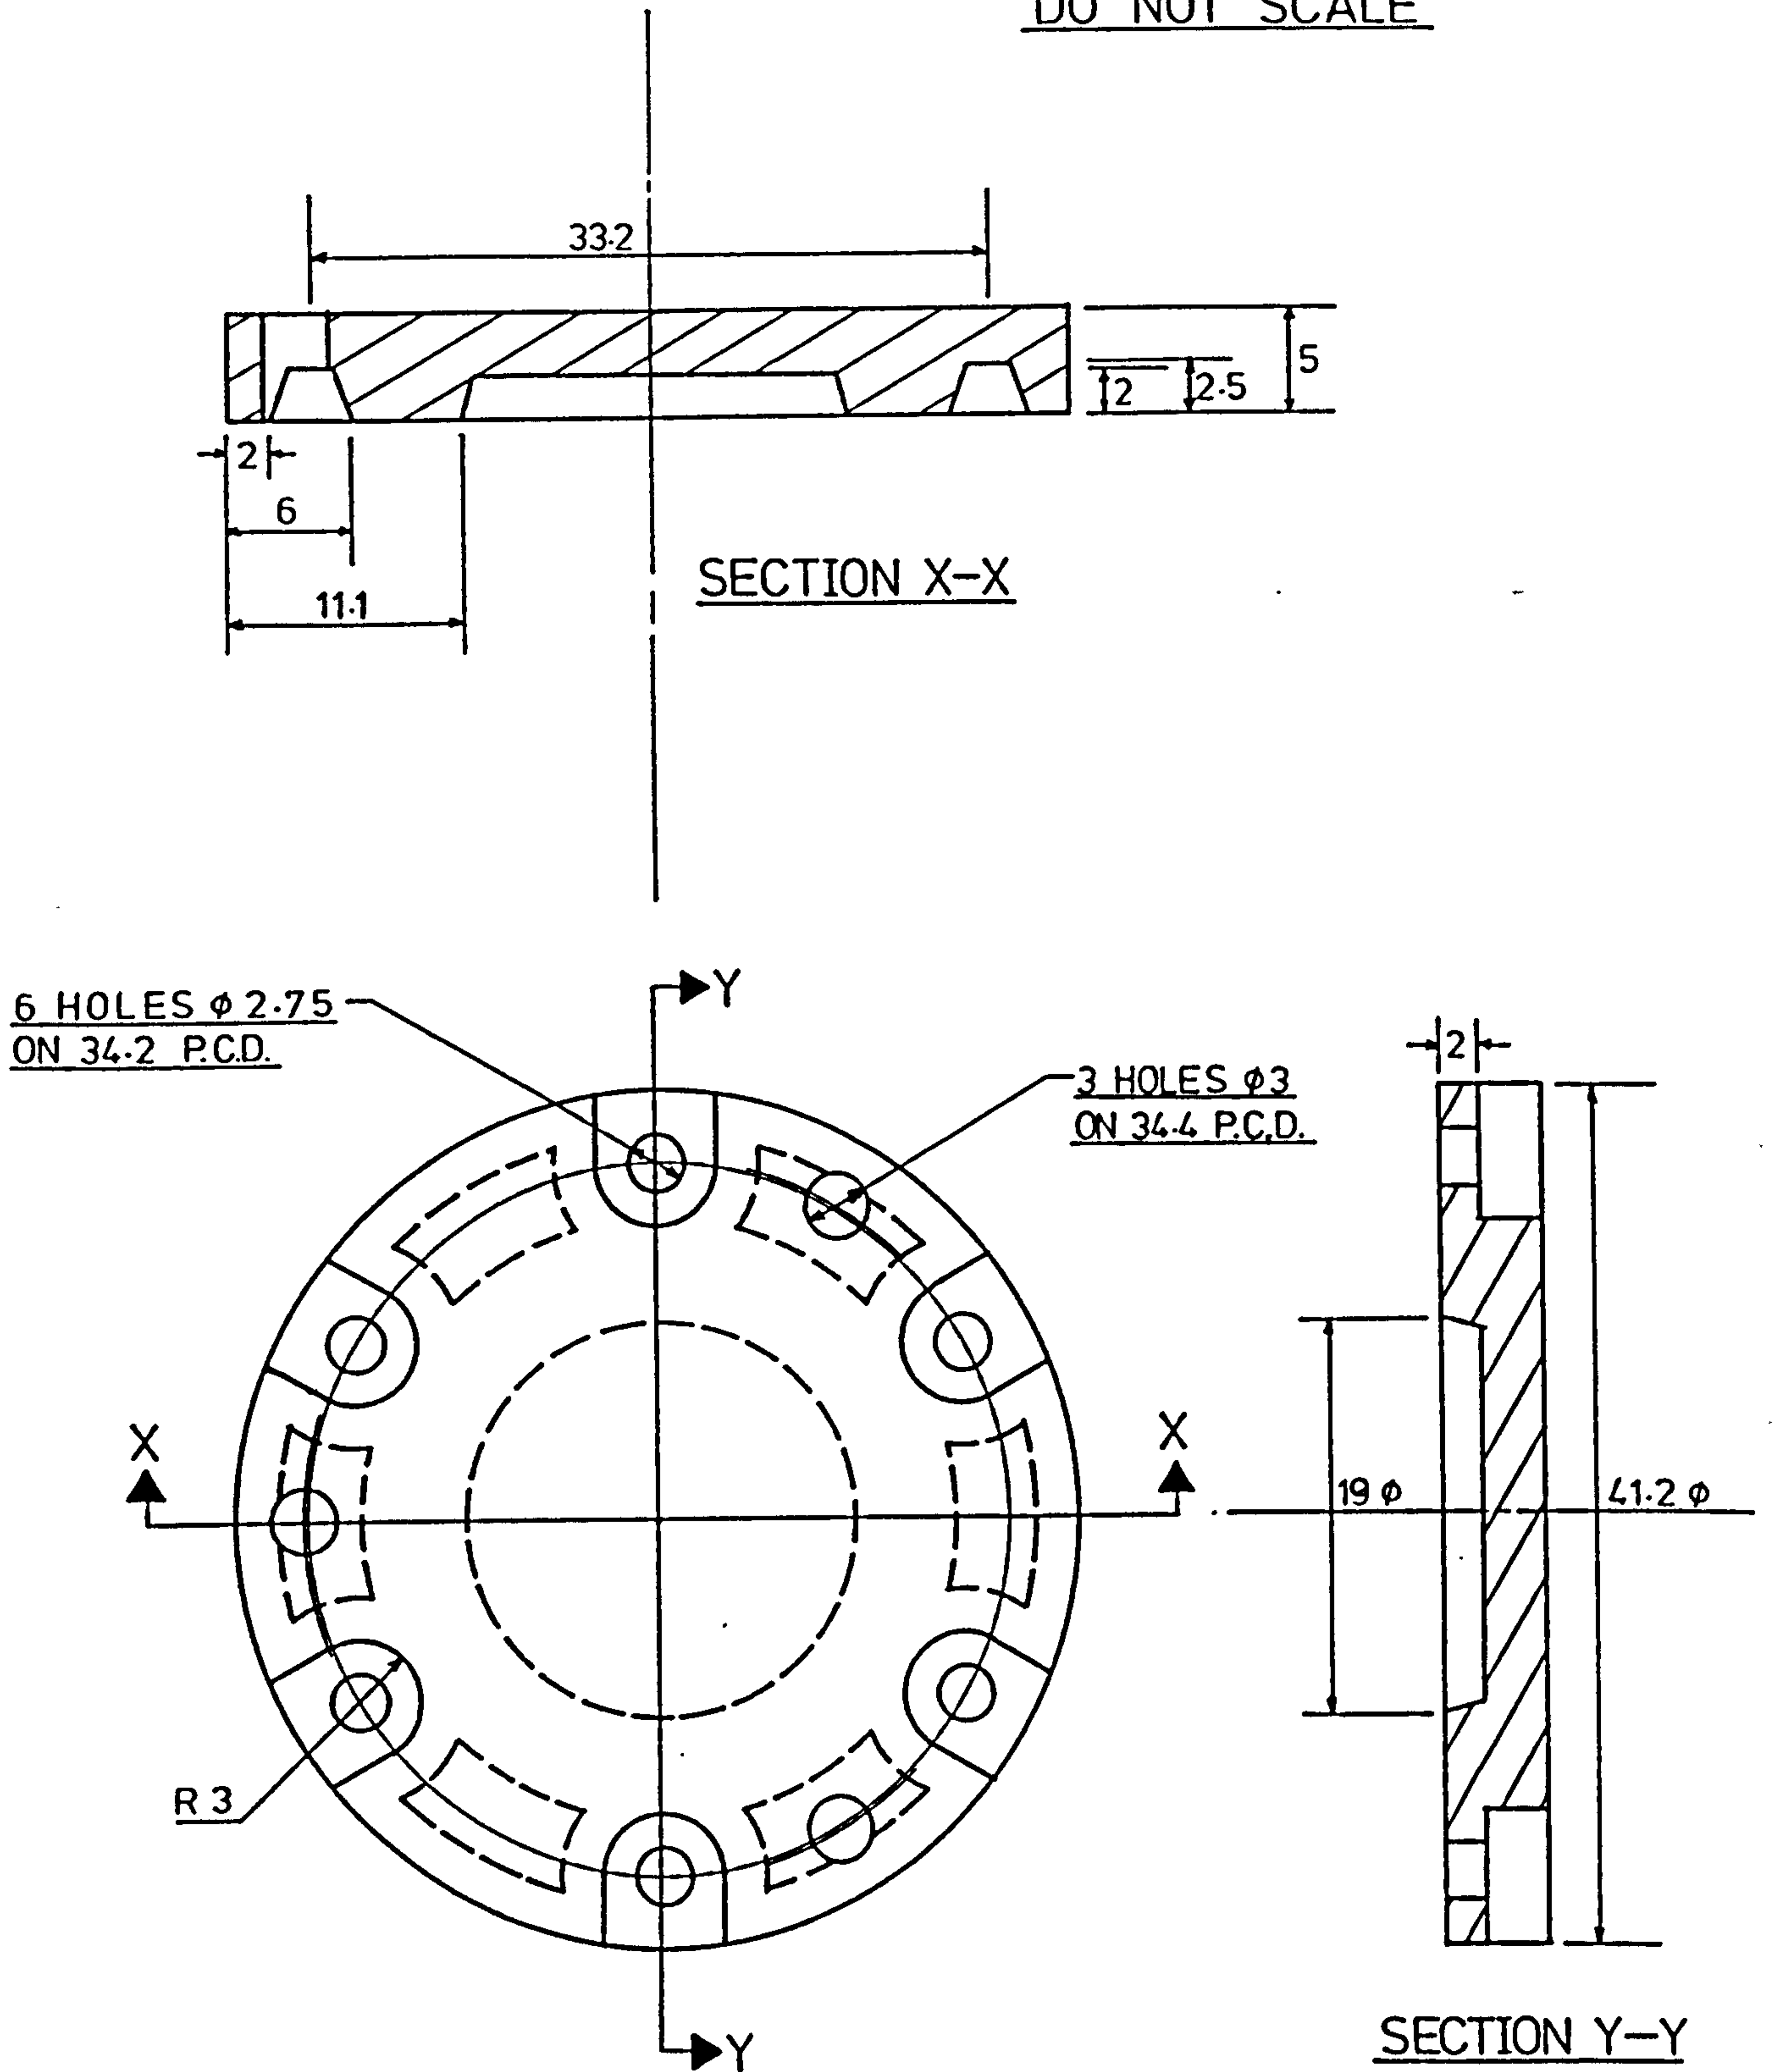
DETAILED DRAWING OF MOULDED WORKING PLATE
